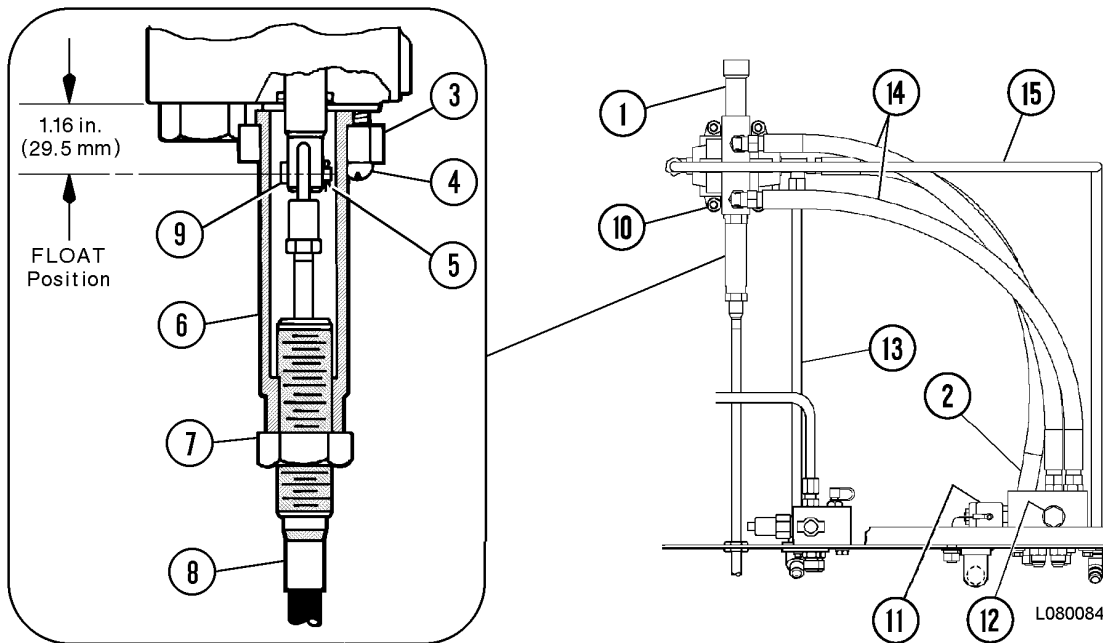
HOIST PILOT VALVE REMOVAL
